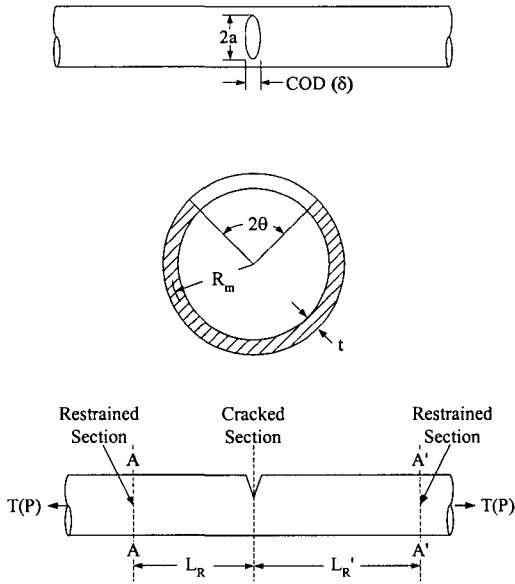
Schematics of a through-wall cracked pipe under conditions of PIB restrained
